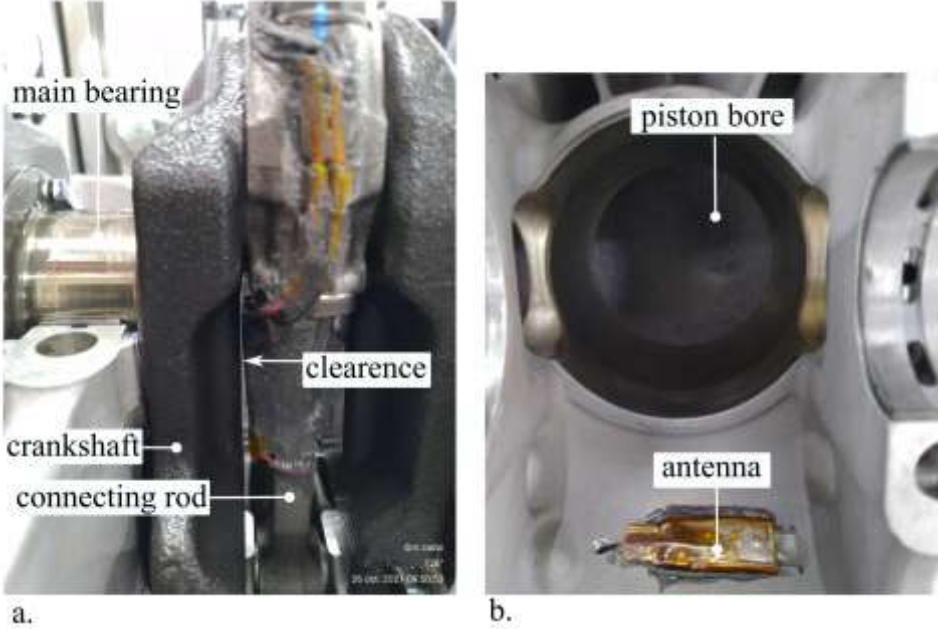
Connecting rod assembly inside the engine: a. clearance check; b. antenna mount
